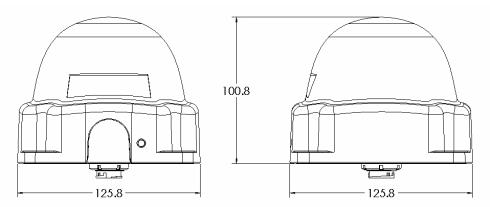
IDP-690 Side View Enclosure Dimensions (mm)
